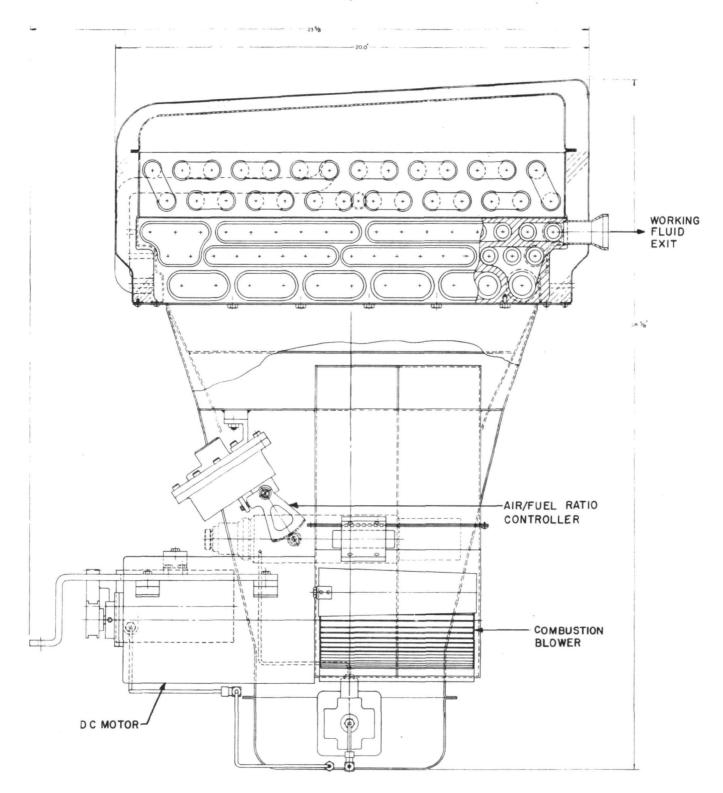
Side View of Combustion System-Boiler Subassembly.
